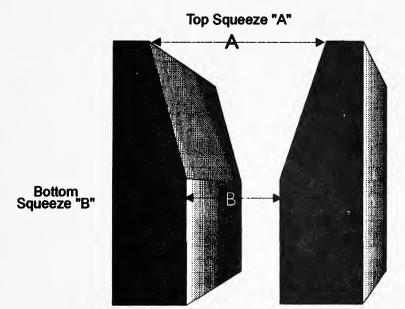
Cross Section of "The Tamer" Drop- Chute showing top and bottom example adjustable dimensions.
